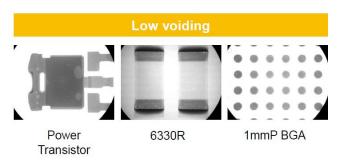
Low voiding behavior on soldered power transistor (L), 6330 chip (center), and 1-mm pitch BGA components (R).
